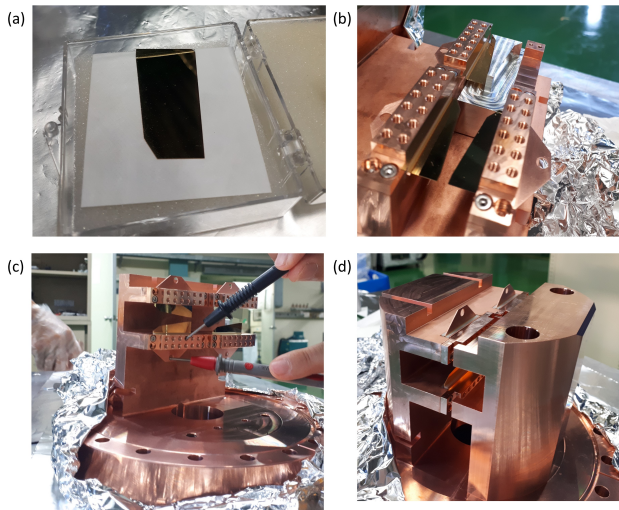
Assembly process for the EPU-PBPM. (a) A piece of CVD-diamond blade, (b) Utilizing jig, (c) Short test, (d) Complete basic configuration.
